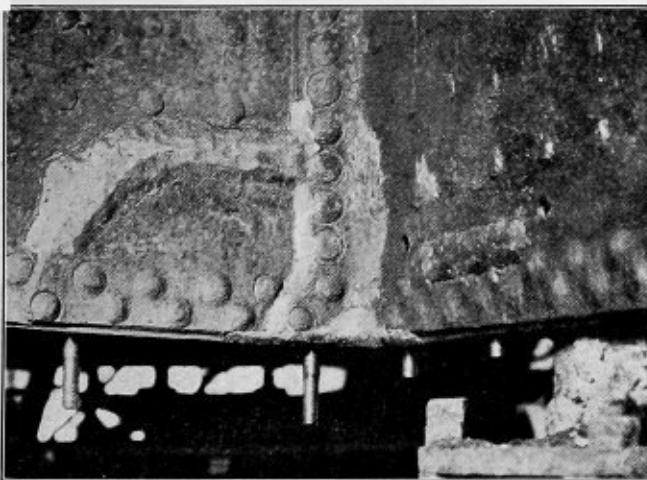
ELECTRICALLY WELDED CRACK IN CORNER OF FIRE-BOX
